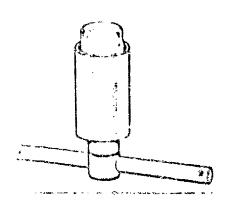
Puller for the reverse gear block shaft (model 2469)
